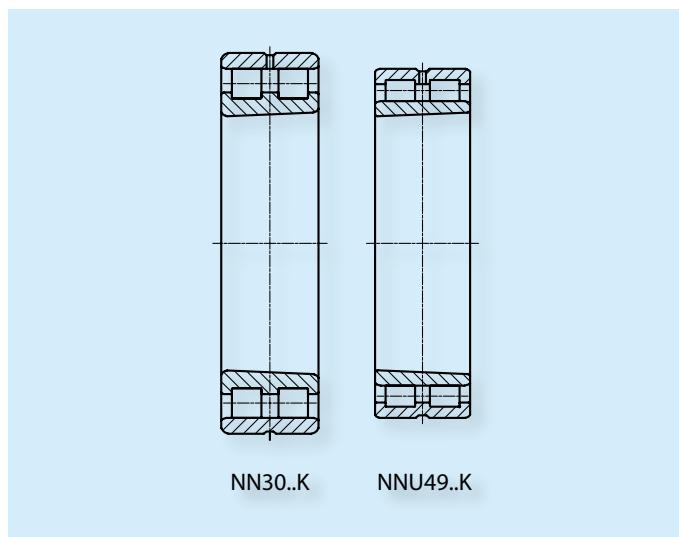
series of double-row high-precision cylindrical roller bearing
